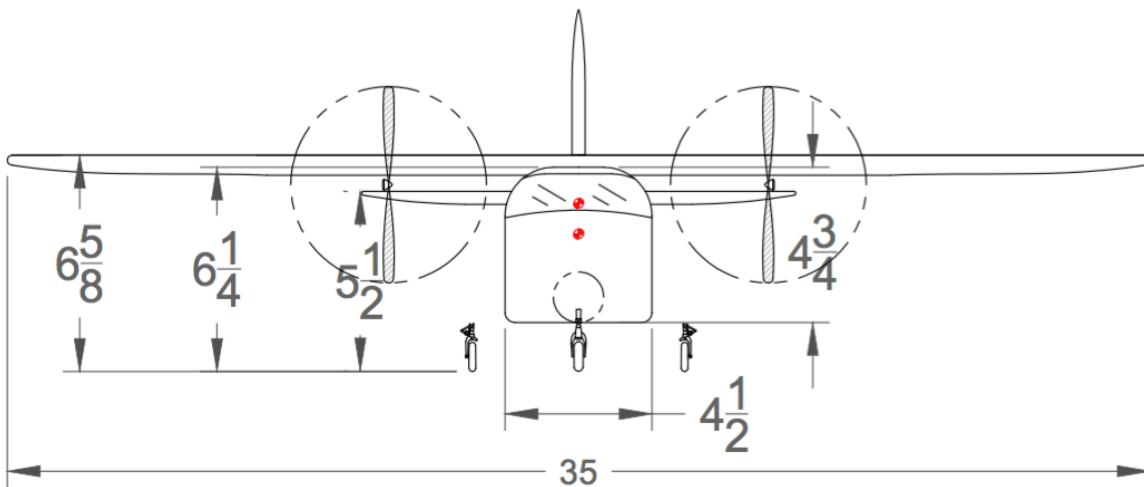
7 Preliminary AutoCAD Front View of Aircraft
